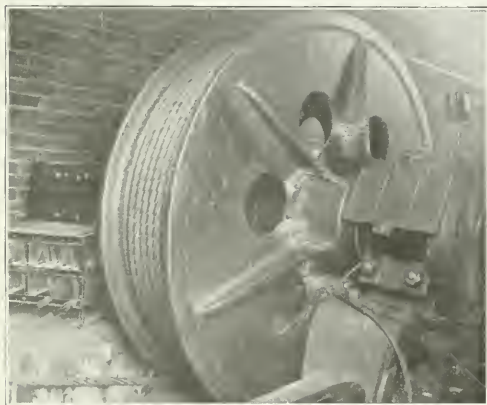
WELD ON A CAST-IRON HOISTING SHEAVE
